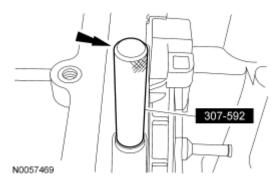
Identifying TR Sensor In Transaxle Case Courtesy of FORD MOTOR CO.
